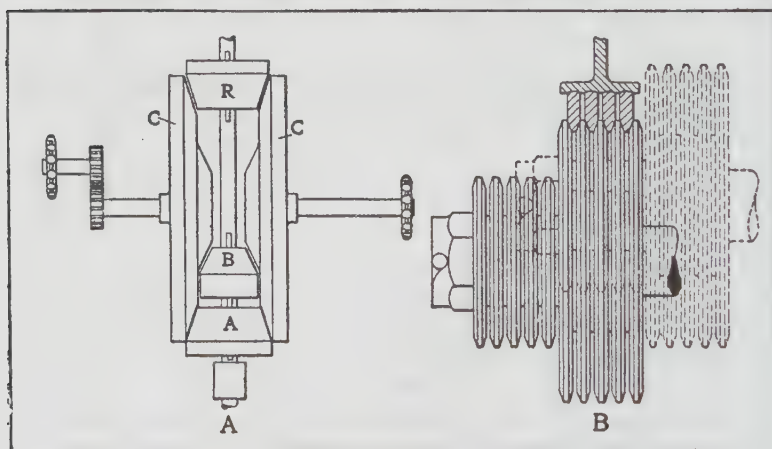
TYPES OF STEPPED FRICTION DRIVES.
